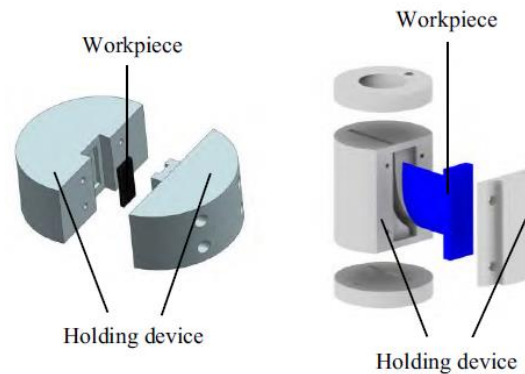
Fixture holding the workpiece on the left and a flat-bladed aero-blade on the right
